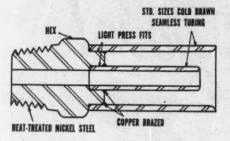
Fitting Redesigned for Manufacture from a Machined Piece and Two Pieces of Tubing, Saving Critical Materials and Reducing Production Time
